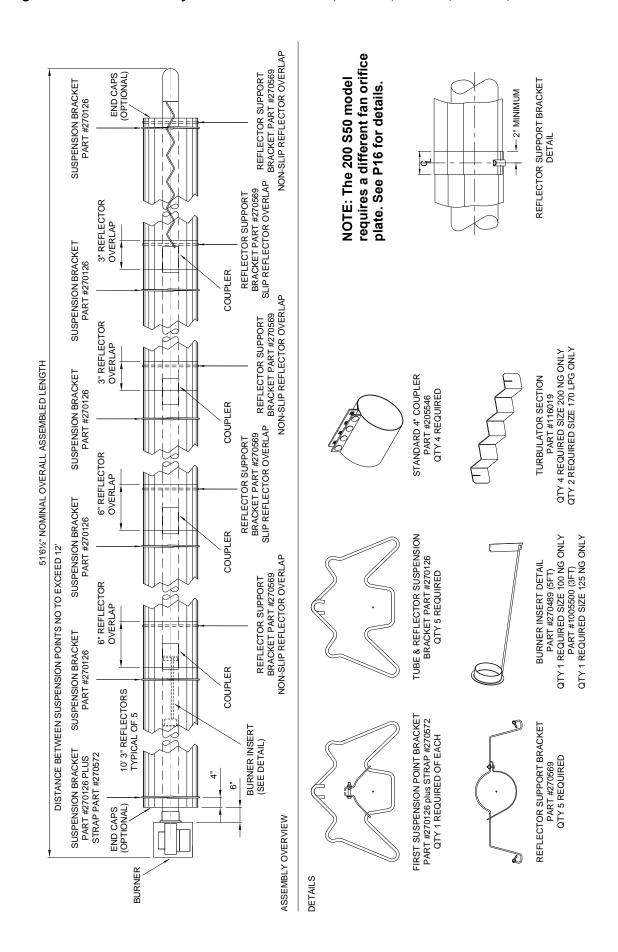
Heater Assembly: Model Linear 125-S60, 150-S60, 170-S60 and 200-S60
